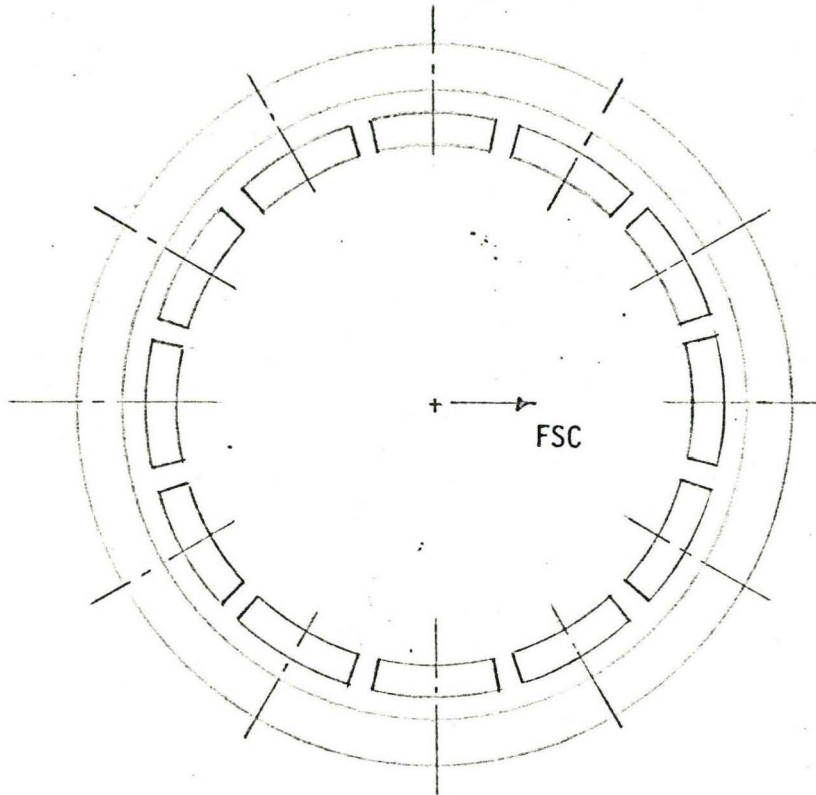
Plan View of Guide Bearing Under Short Circuit Loading
